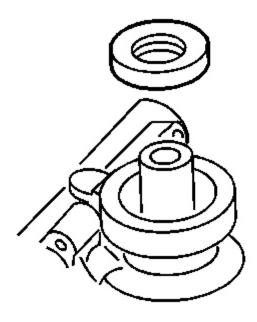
Power Steering Pump Drive Shaft Seal Courtesy of GENERAL MOTORS CORP.
